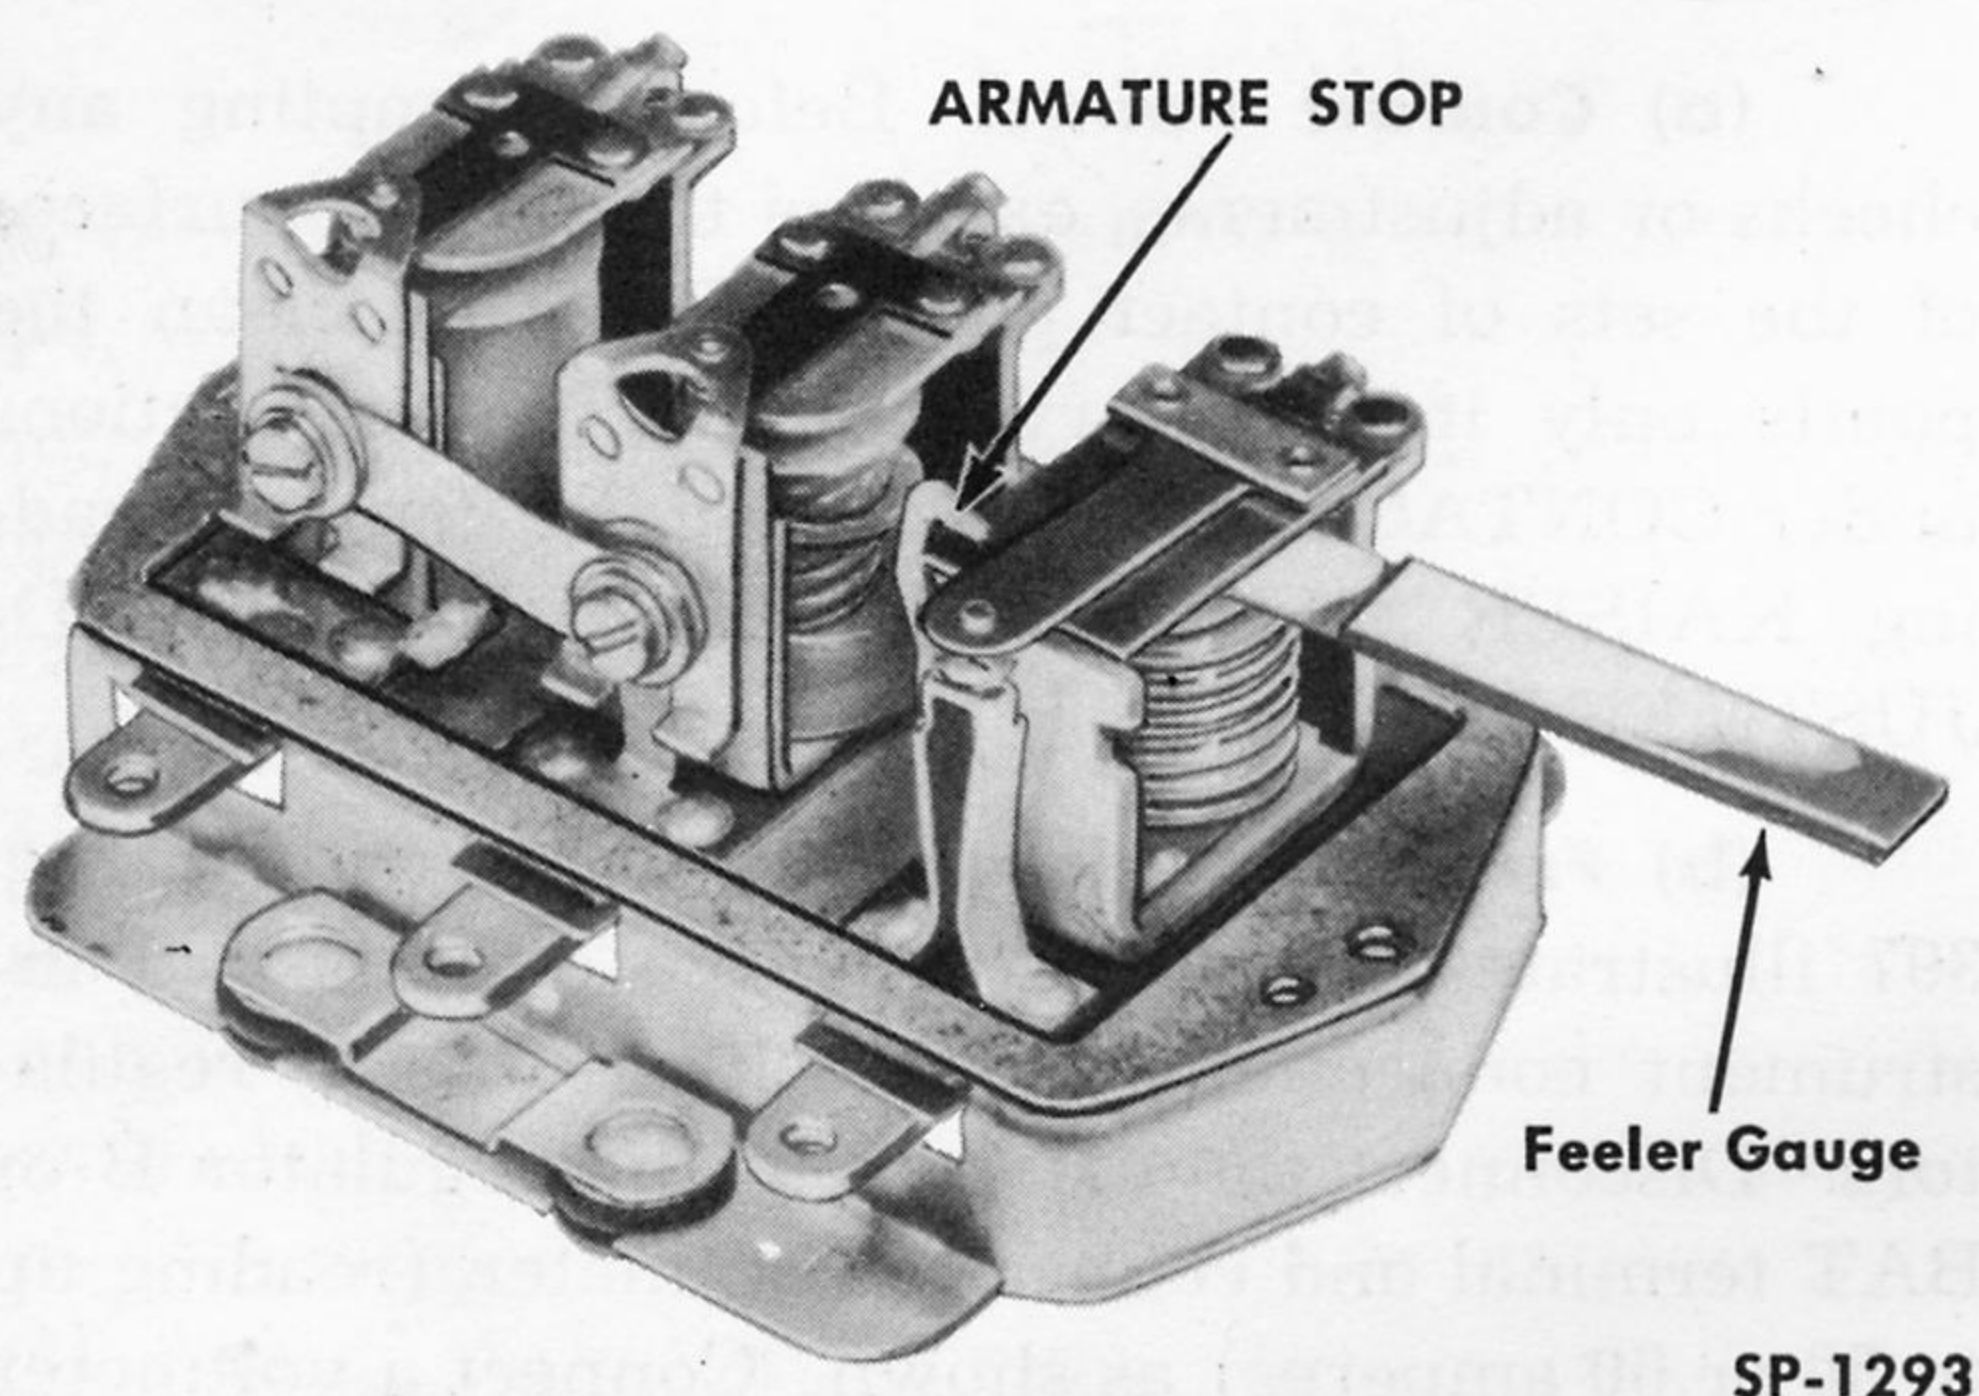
Checking and Adjusting Frazer Breaker Armature Air Gap
